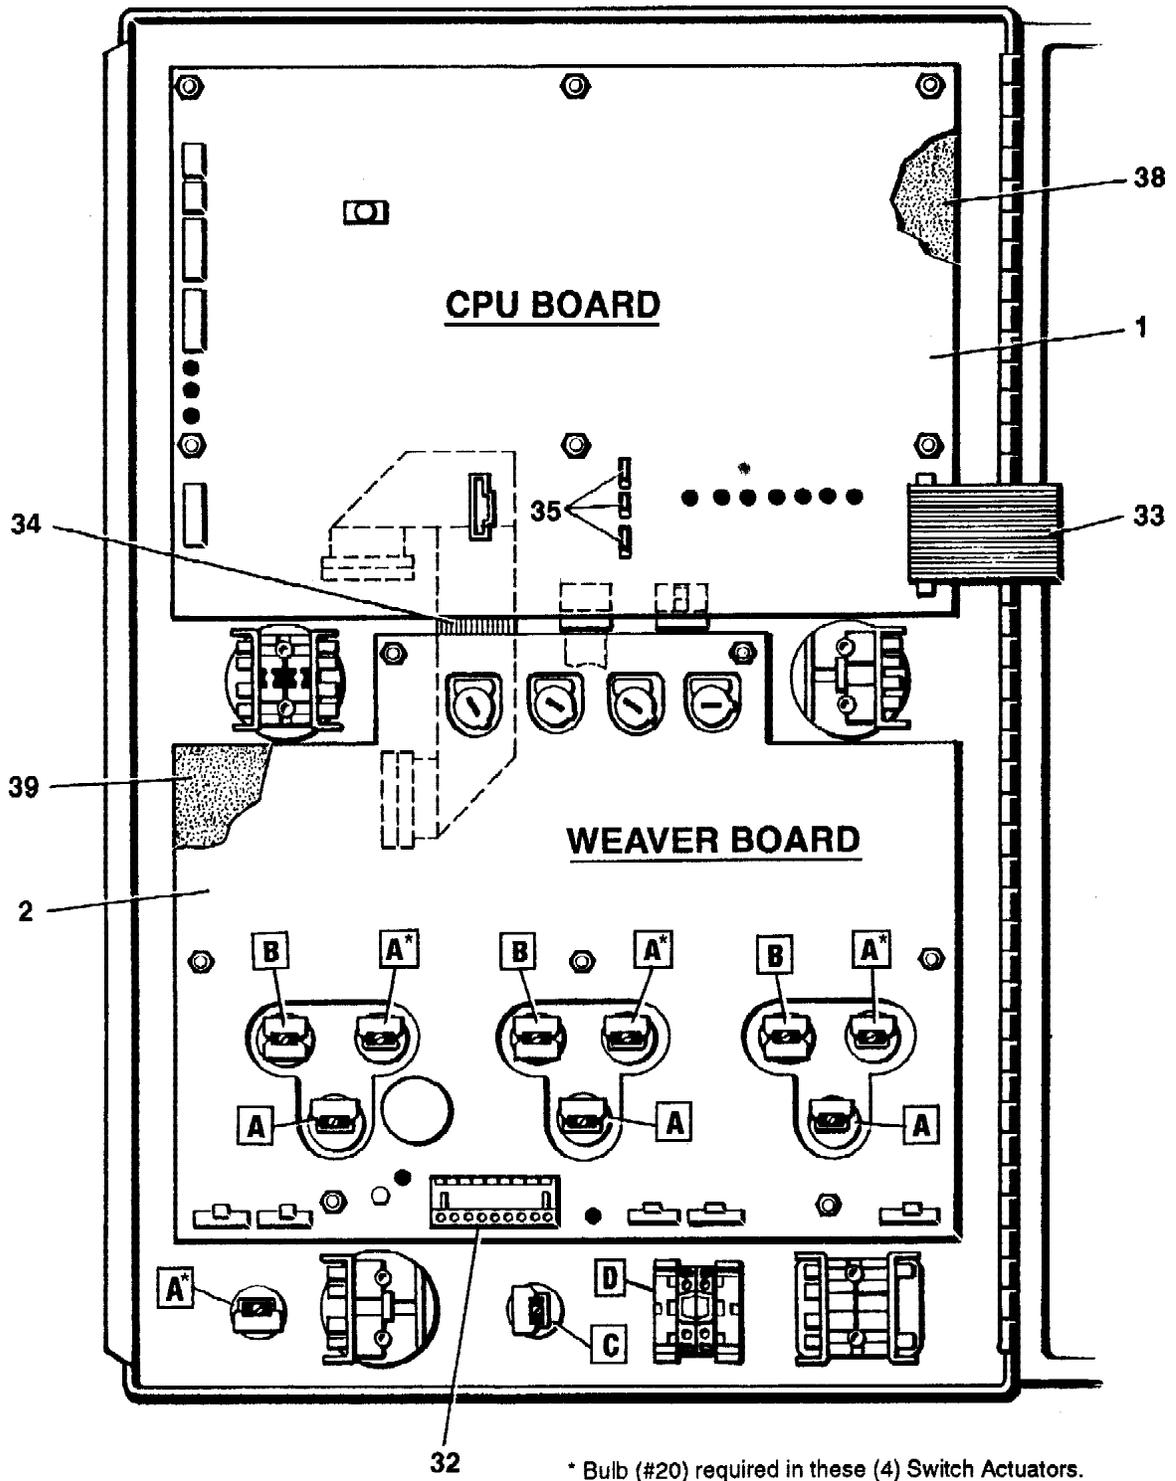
PosiWeave Control (CPU Board and Weaver Board)
